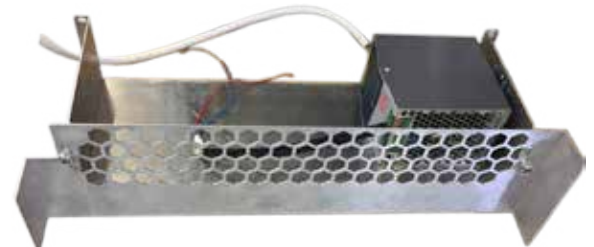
Air Tray (with cover) with Assembled and Wired Power Supply
